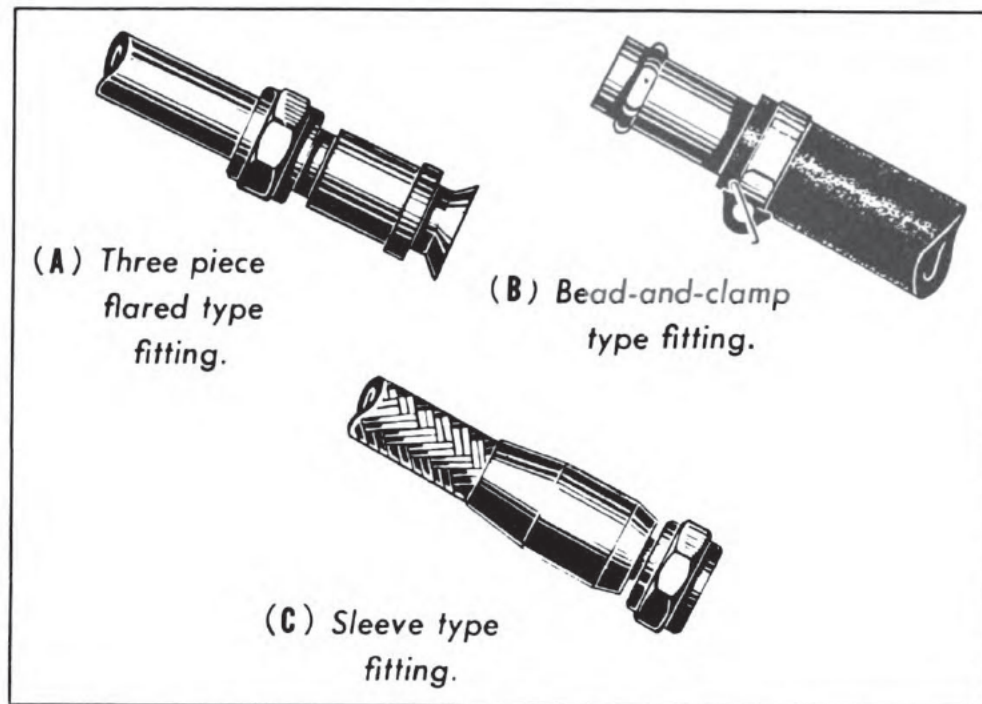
A. Three-piece flared type fitting. B. Bead-and-clamp-type fitting. C. Sleeve-type fitting.
